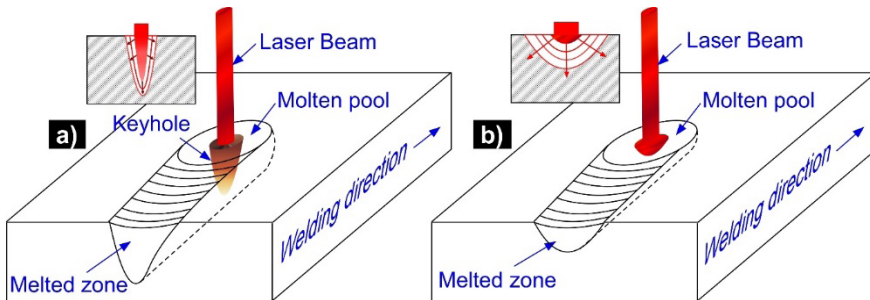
Schematic representations of laser beam welding mechanisms. Key hole mechanism (a) and conduction mode mechanism (b).
